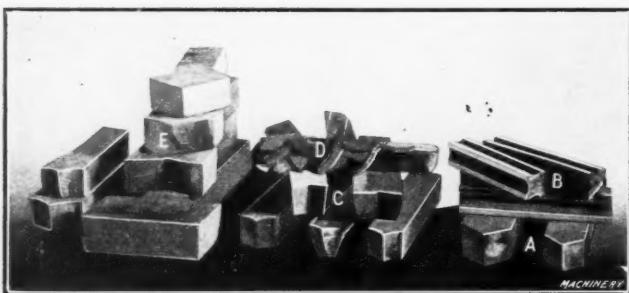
Tools used in Turning Chilled Cast-Iron Rolls
